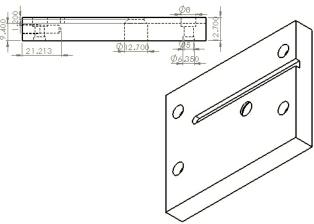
Dimensions for the small mill headstock mounting plate.
